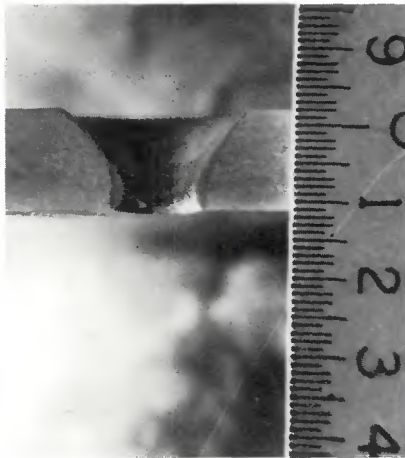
Cross section through center of a keyhole mode plasma arc weld. Welding parameters: 86 A, 22.5 V, 1/4 in. (6.3 mm) arc length, 10 cfh (78.6×10^3 mm³/s) orifice gas and 6.5 ipm (2.75 mm/s) travel speed
